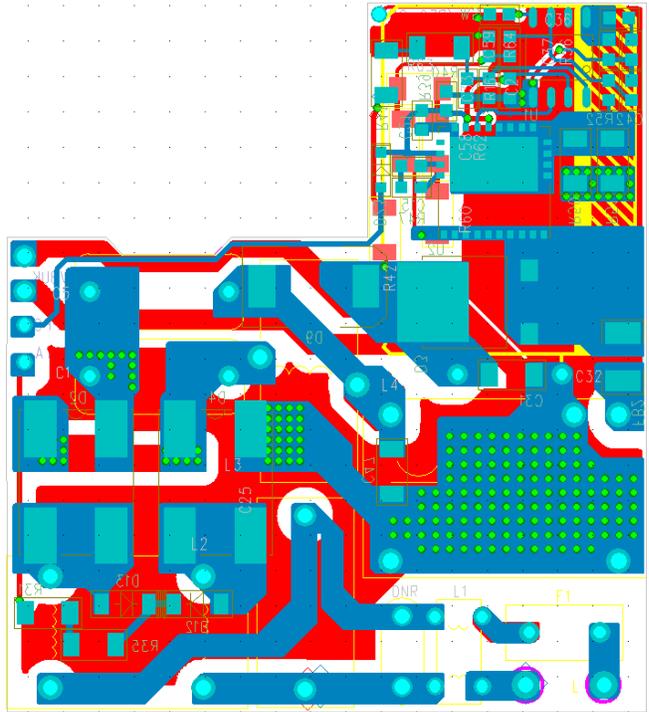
(Bottom), Bottom View of PCB, SOIC8
